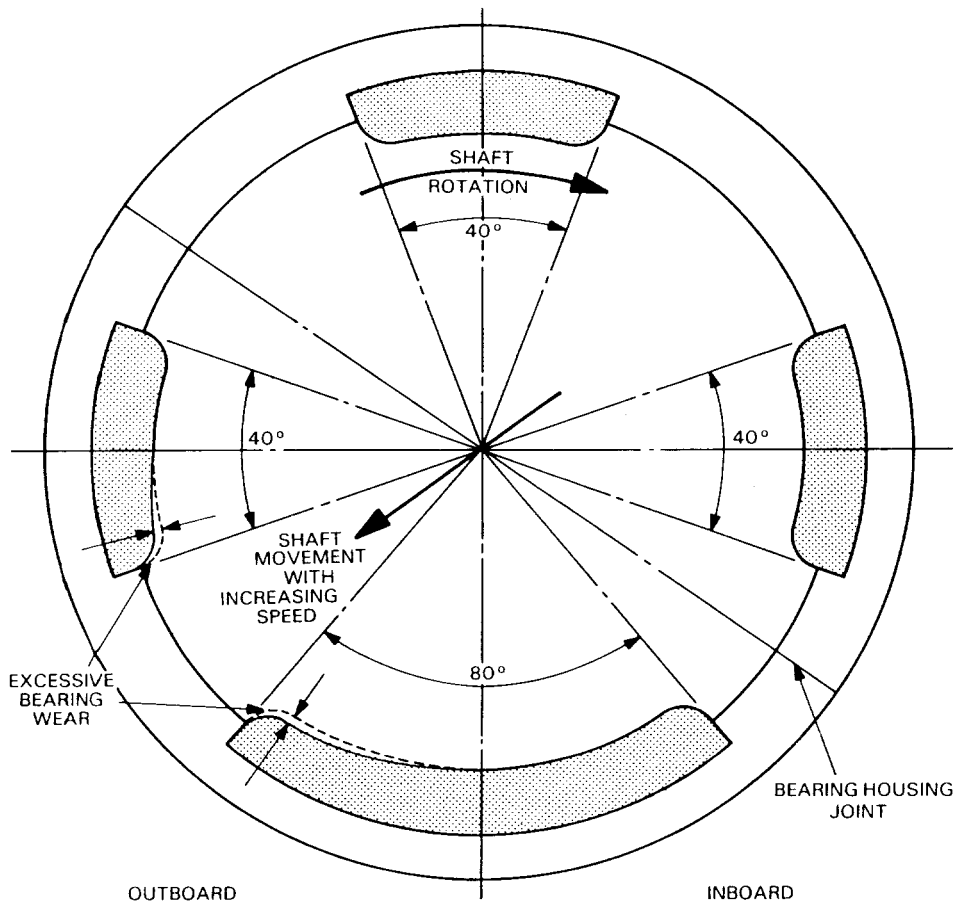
TYPICAL TYPE 42 INTERMEDIATE 'A' BRACKET BEARING WEAR PATTERN, LOOKING FORWARD
